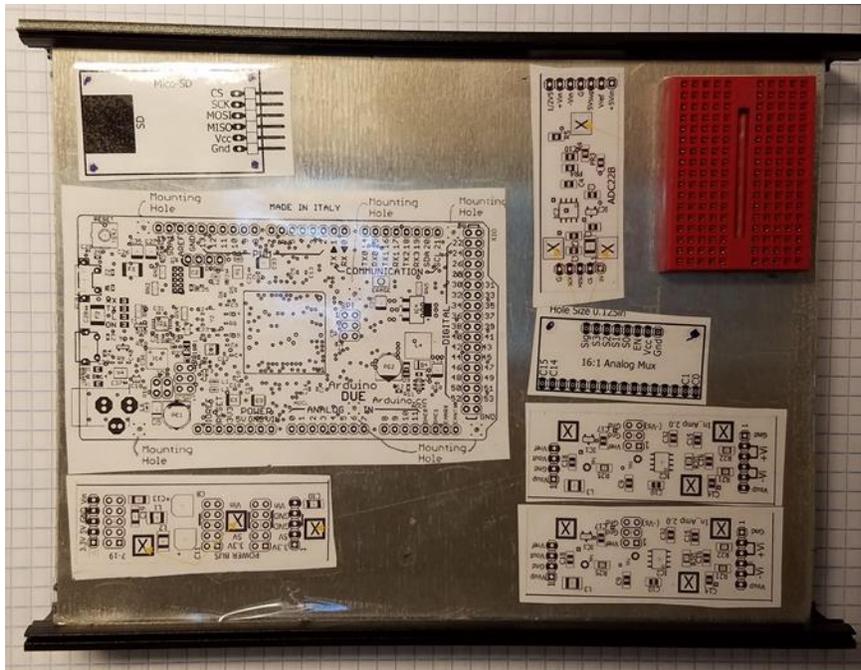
The layout using dolls taped on to a sheet of 304 stainless steel, 0.040 inch thick. The dolls include mounting hole locations.
